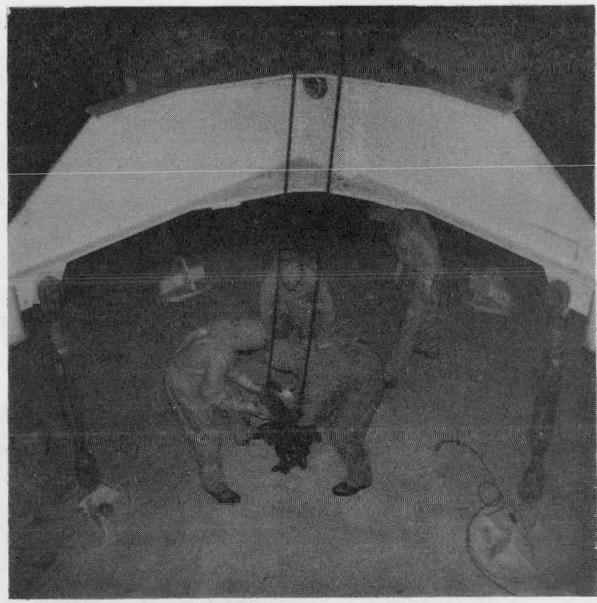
Corroded and Broken Drywell Head Bolts (Quad Cities)
